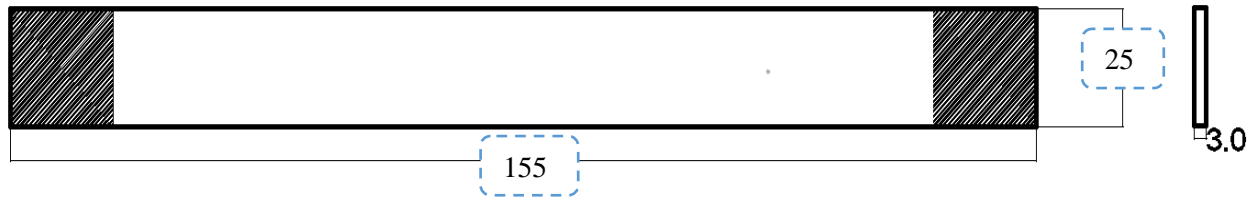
compressive specimen dimensions (mm) in accordance with ASTM D3410 (6" length *1"width)
